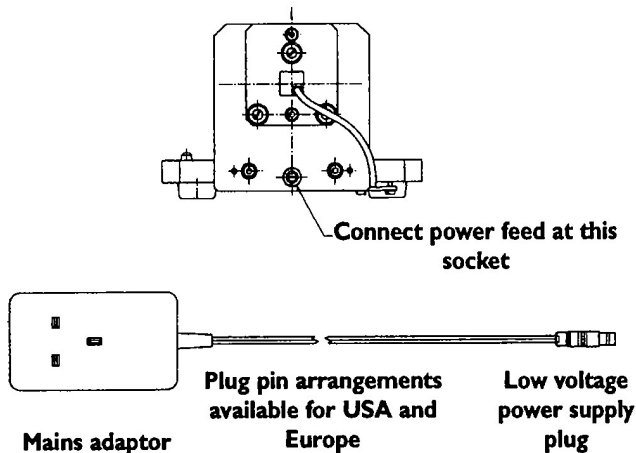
End view of Laser Alignment Accessory and power transformer with connecting lead and plug
